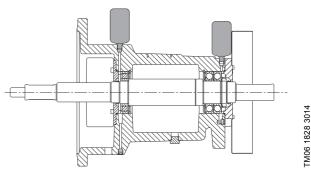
Bearing bracket with open roller bearing and double angular contact bearing lubricated via automatic grease lubricators
